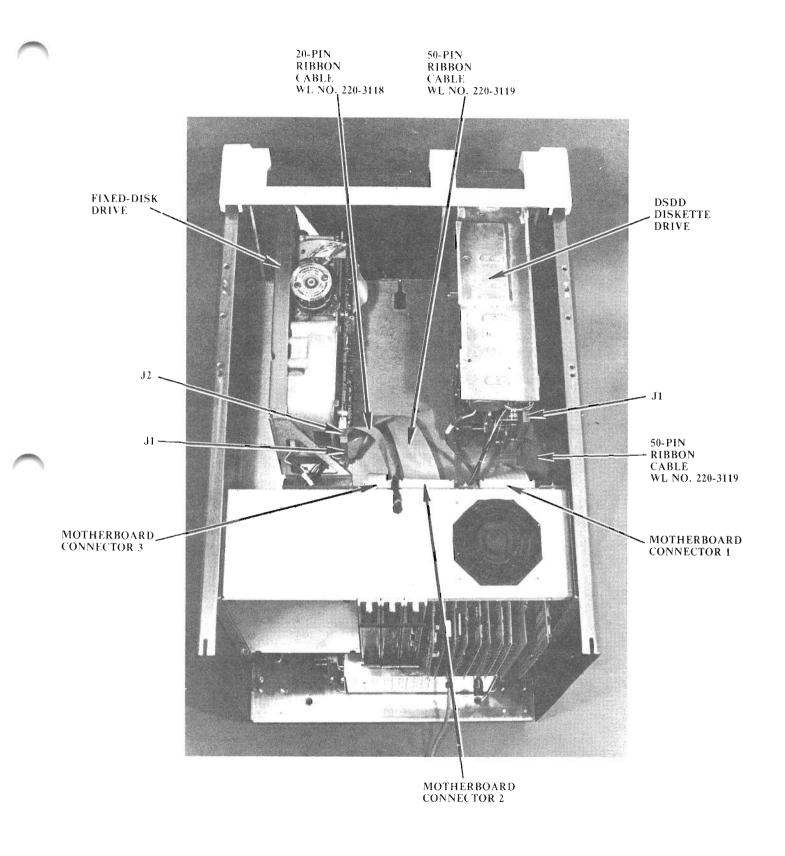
DISK DRIVE I/O CABLE CONNECTIONS
